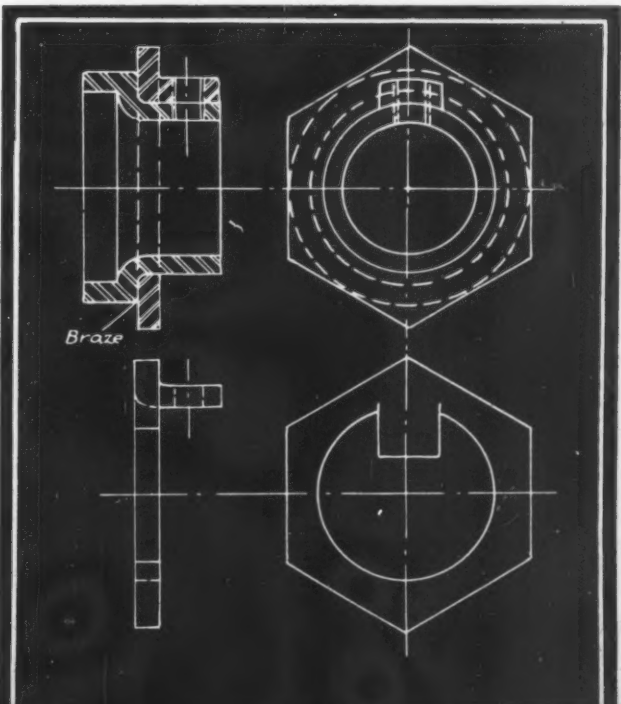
Above—Comparative designs for a hub machined from a forging, left, and an assembly of brazed stampings, sized and coined, right
